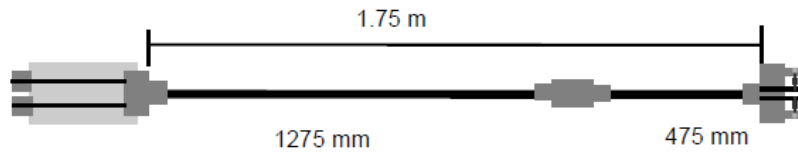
A-1: Coupling- and screening attenuation reference cable assembly
